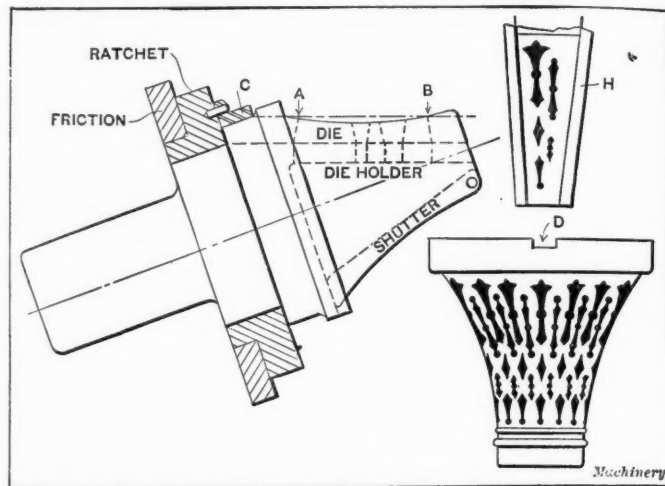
Die and Holder for Perforating Shell shown to the Right
